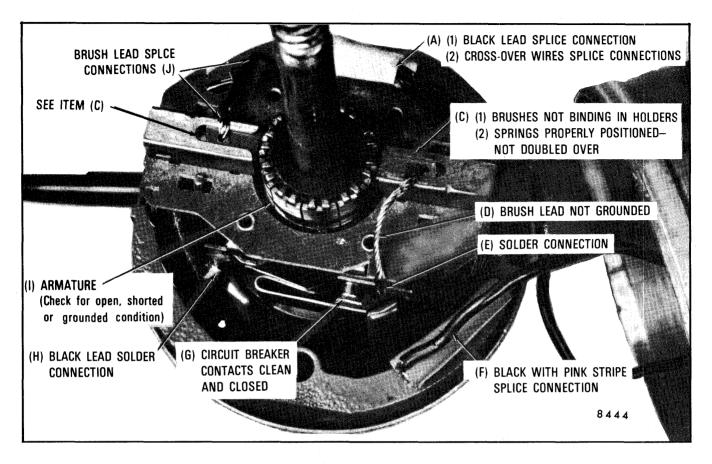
Visual Inspection Modified Pulse Motor
